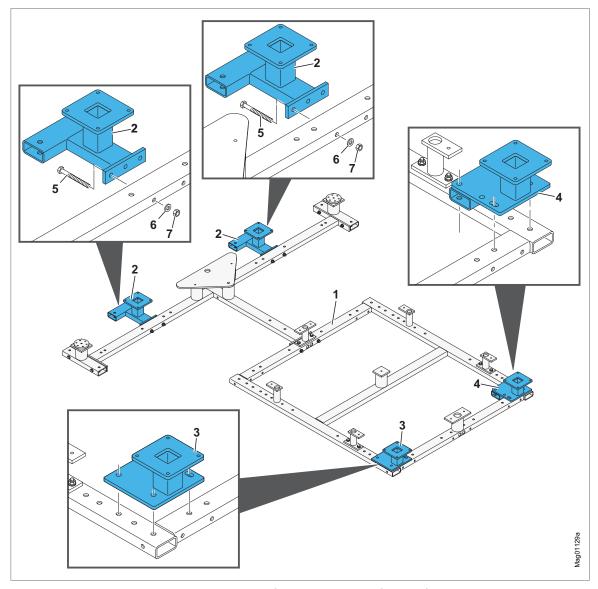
Installing the adapter for the optional roof – base frame FURA-B-D
